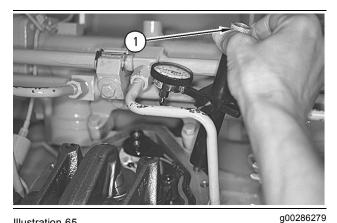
145-5191 Gauge Support (1) Knurled knob
